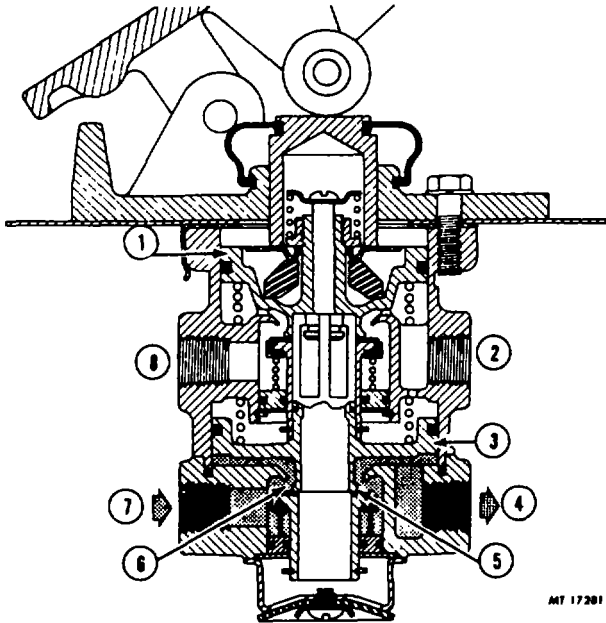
Brake Valve Applied - Loss of Air In Primary Circuit
